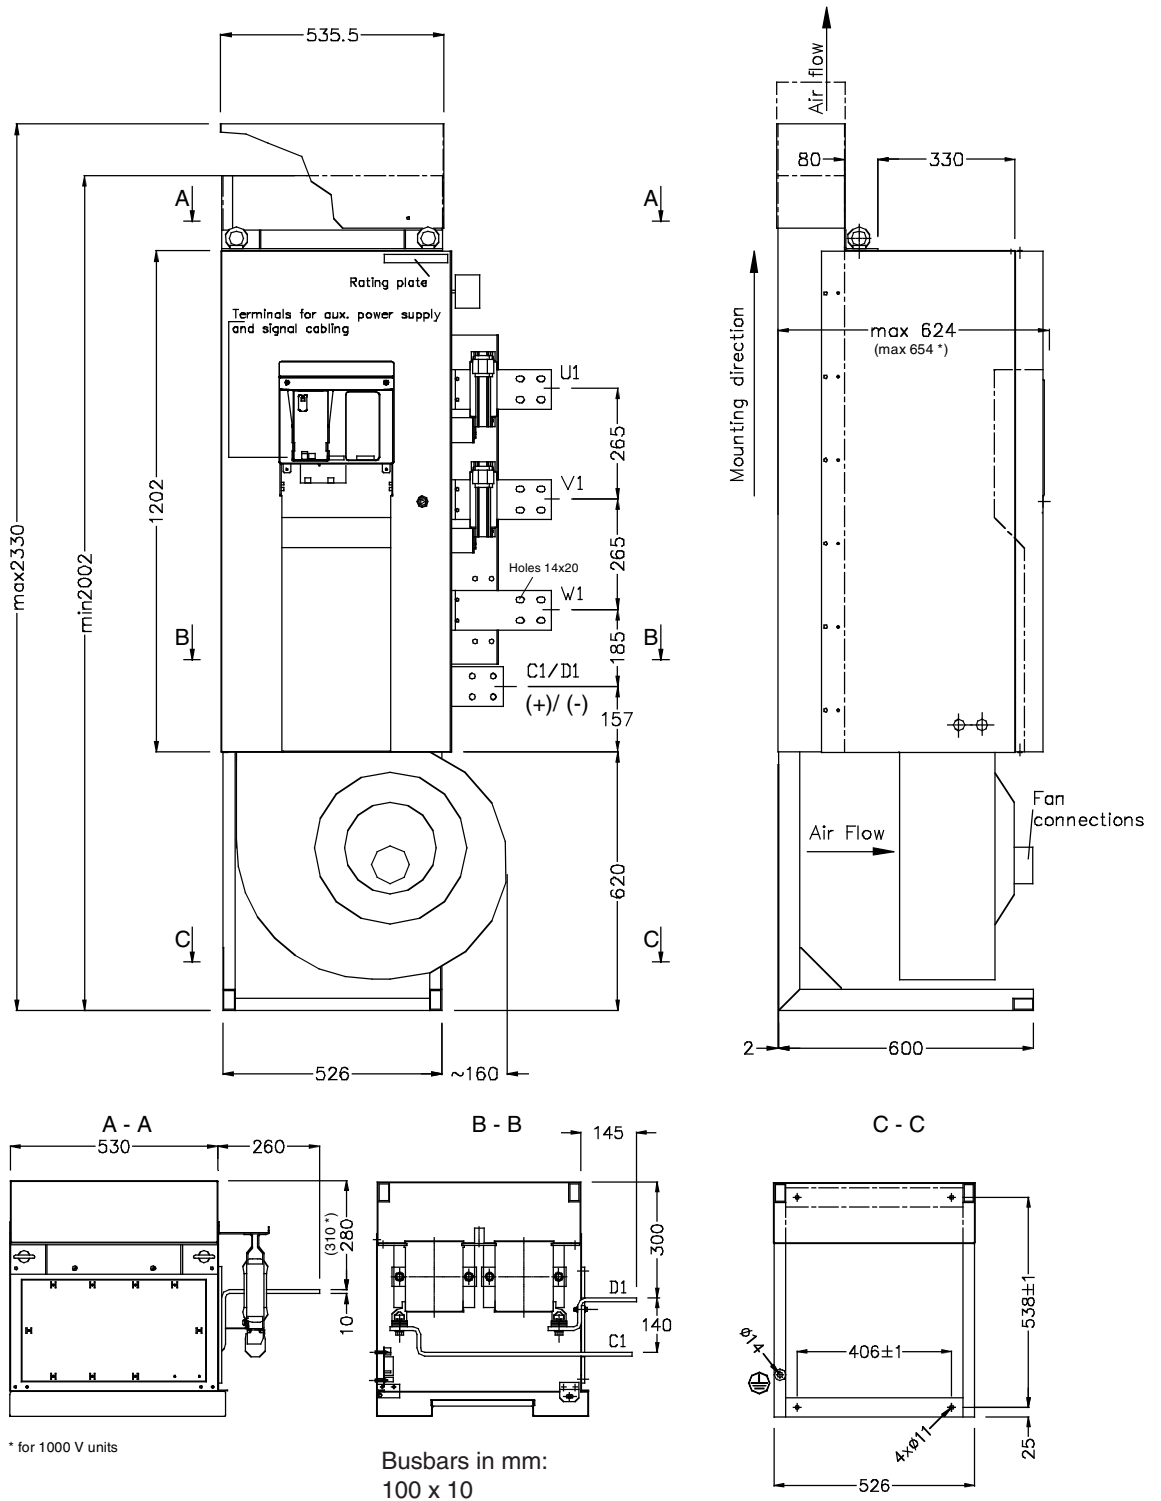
/9: Dimension drawing C4-Module with AC/DC power connection Right-hand side
